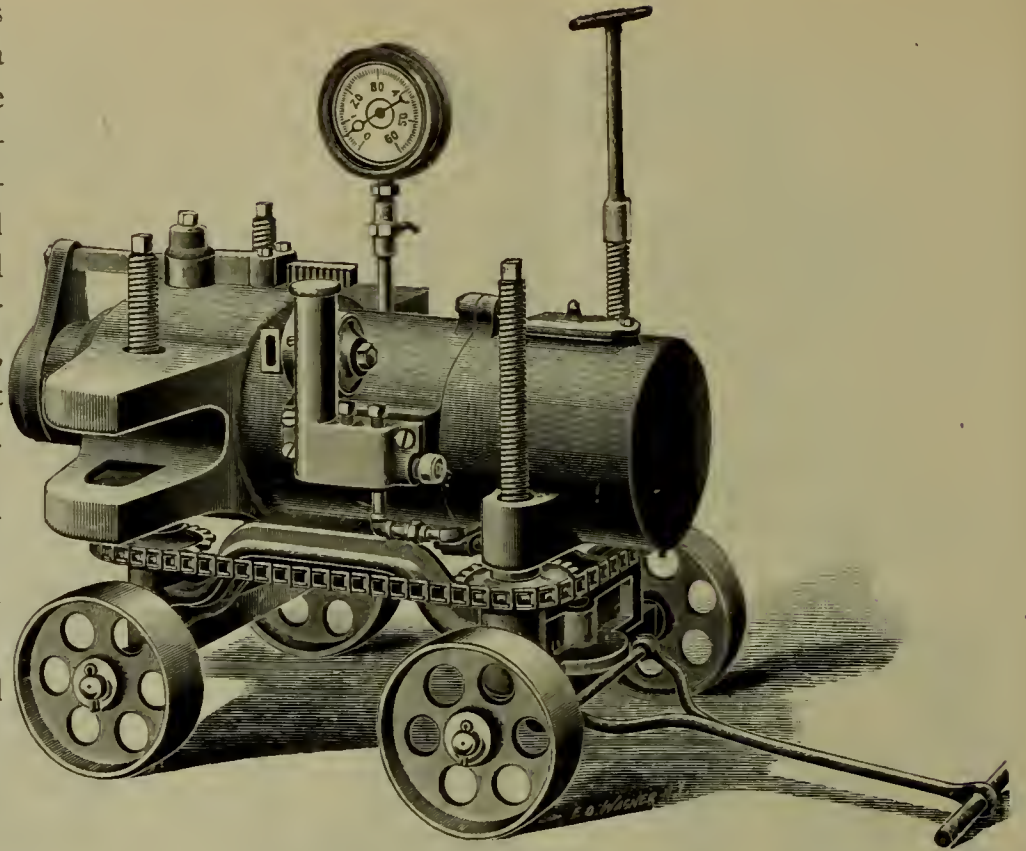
PORTABLE HYDRAULIC CRANK PIN PRESS.
